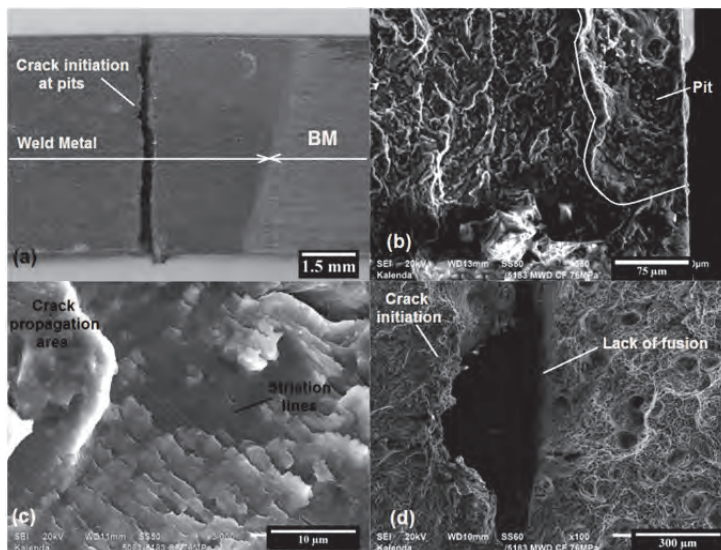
Typical features of fatigue fracture in 5083/ER5356 welds tested in 3.5% NaCl: (a) and (b) crack initiation at pits in the weld metal; (c) crack propagation in the weld metal; and (d) crack initiation at a lack-of-fusion type defect.
